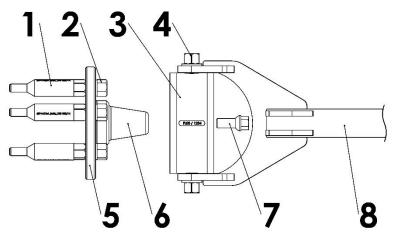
Maintenance of wheel rim adapter and fixation bearing
